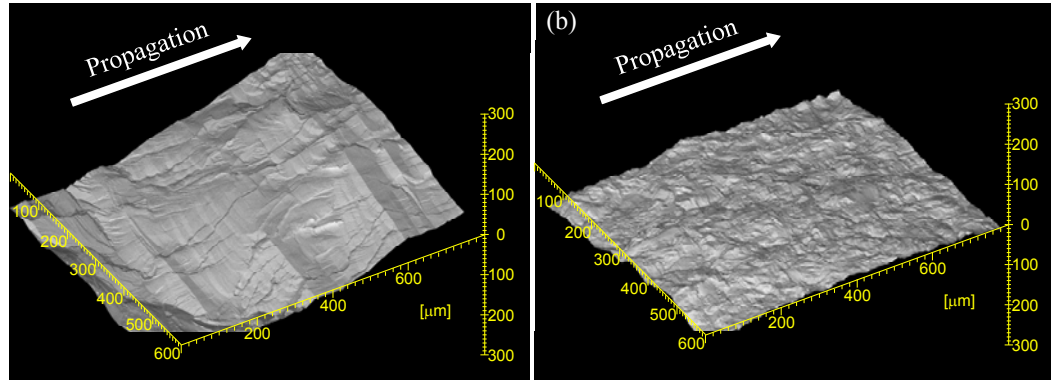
Axonometric drawings of fracture surfaces for (a) Untreated and (b) MM series after testing at  $R = 0.1$ .
